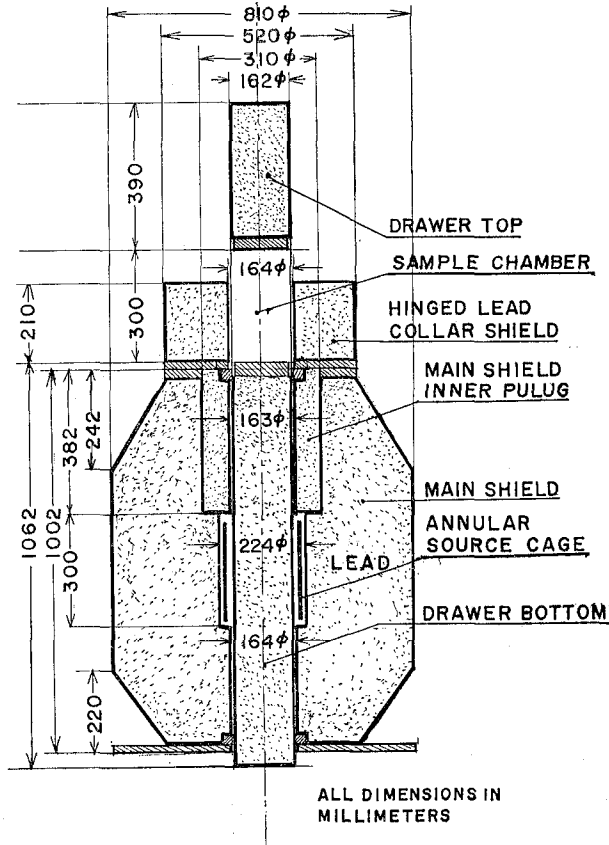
Vertical section of the main shield and a movable drawer holding a sample chamber. The figure shows the chamber raised to the sample loading position.
